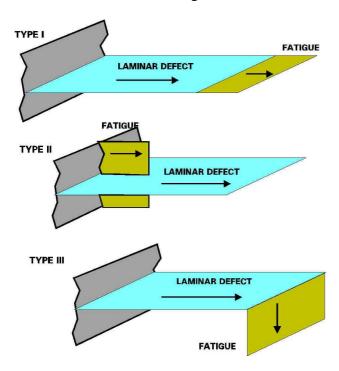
Three configurations in which fatigue cracking can be associated with laminar corrosion defects.
